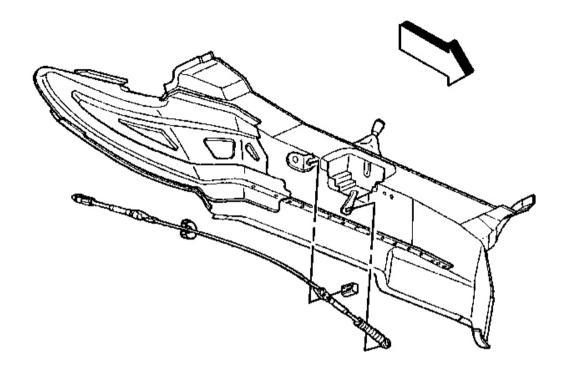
Shift Control Cable & Driveline Tunnel Bracket Courtesy of GENERAL MOTORS CORP.
